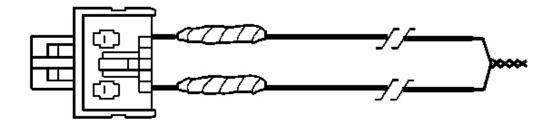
Bending Twisted Connection Flat & Insulating With Tape Courtesy of GENERAL MOTORS CORP.
